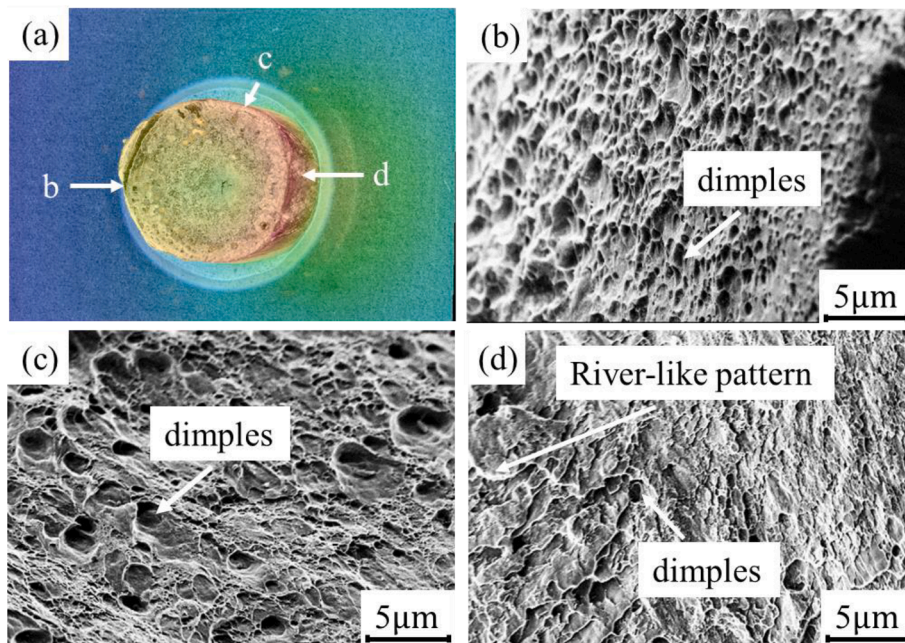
Top view and SEM micrographs of fracture surface of R-LSW joint: (a) top view of fractured weld; (b)-(d) SEM images of the fractured surface located at zones of b-d. (laser power of 3000 W).
